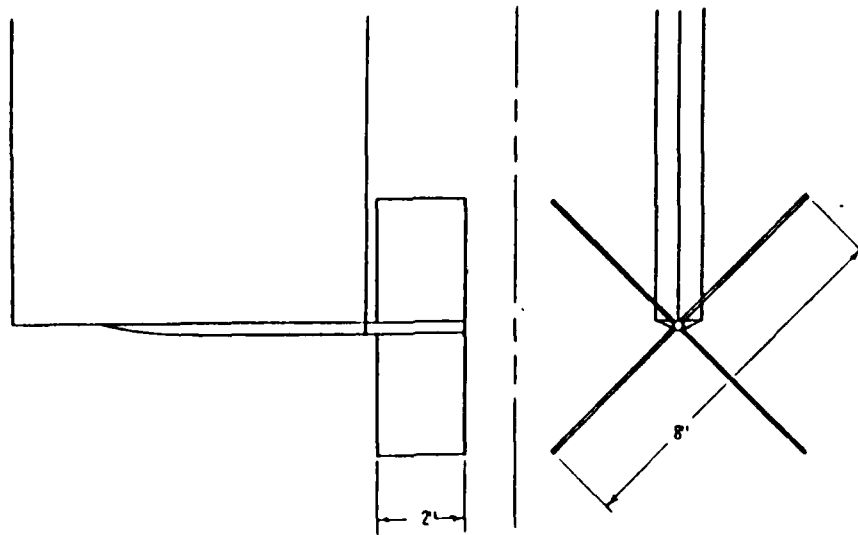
Sketch of Fixed Crossed Blades (Eight Inch)
